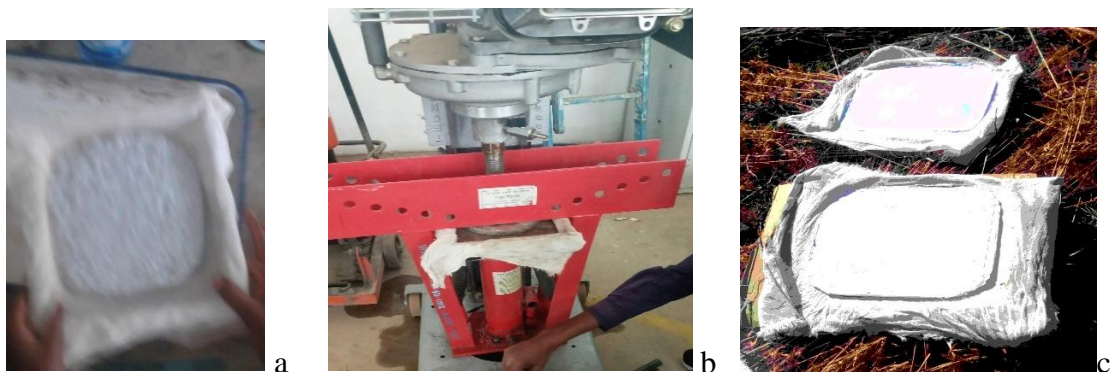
pulp molding(a) pressing of wet sheet (b) and (c) after pressing
